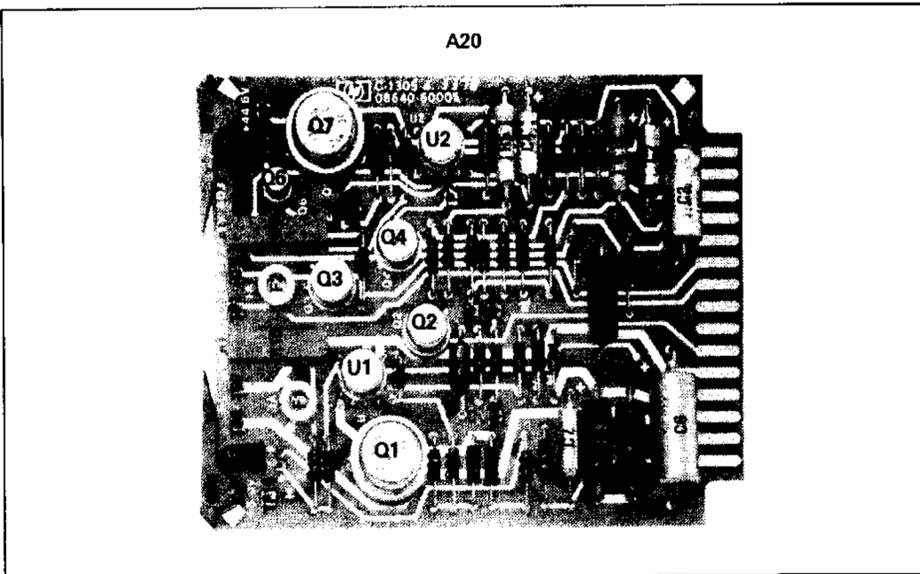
A20 +5.2V and +44.6V Regulator Assembly Component Locations
